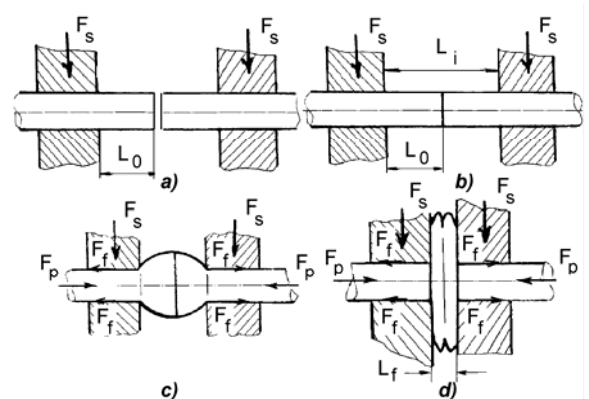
Butt cold welding phases: a) – initial clamping; b) – bars in contact before upsetting; c) - upsetting phase; d) – welded joint after upsetting;  $F_s$  – clamping (squeezing) force;  $L_0$  – one bar initial standoff;  $L_i$  – total initial standoff;  $F_p$  – upsetting force;  $F_f$  – friction force;  $L_f$  - final standoff (after upsetting)
